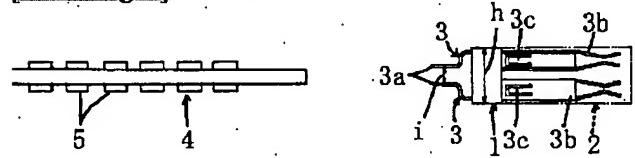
[Drawing 2][Drawing 3][Drawing 4]
